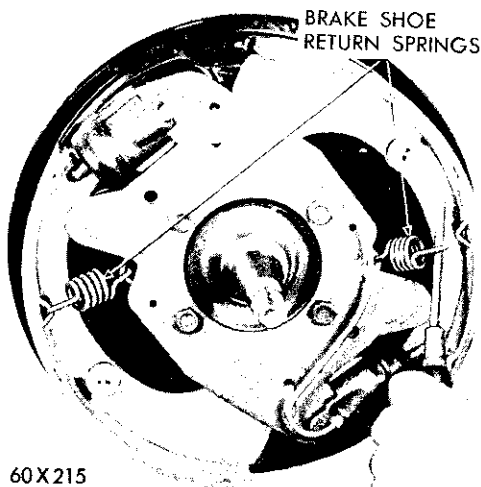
Removing and Installing Brake Shoe Return Spring (Front)
